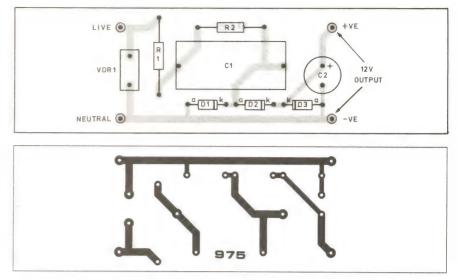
Printed circuit board component layout and full size foil master for the 12V Capacitive PSU. The extra board space at each end allows it to safely slot into its case.
